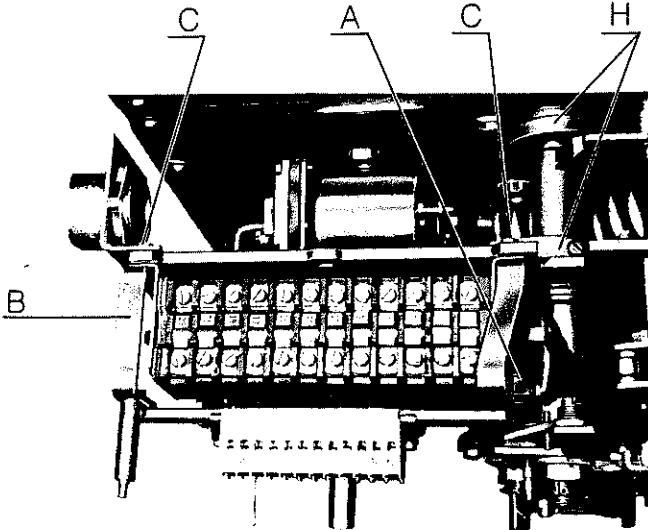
Assembly of auxiliary contacts (Nr. 5 and 12) for operating mechanisms up to SACE ES-ESM 16/20.
